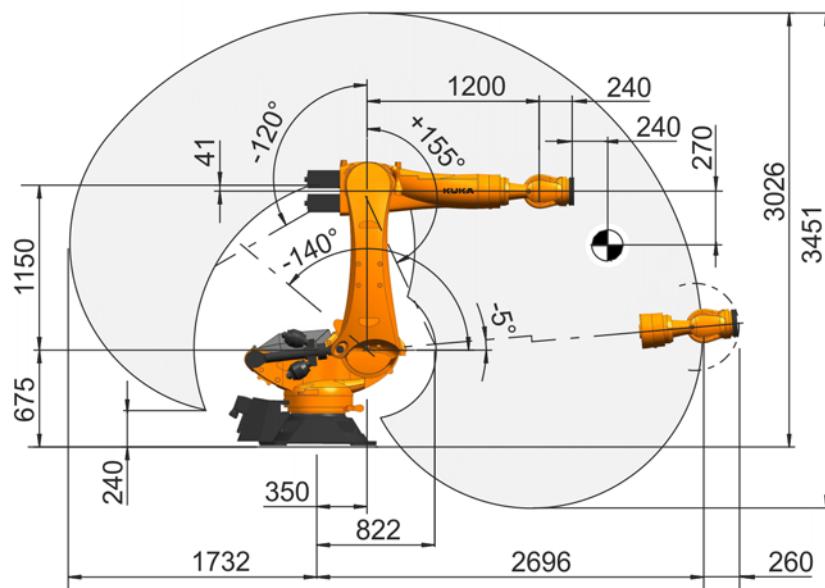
KR 210 R2700 prime CR, working envelope, side view
